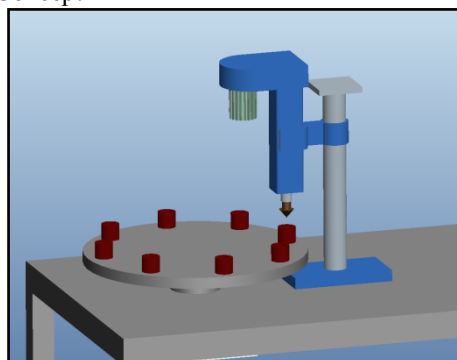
Concept Drawing of Indexer Cot Chamfering Mechanism
